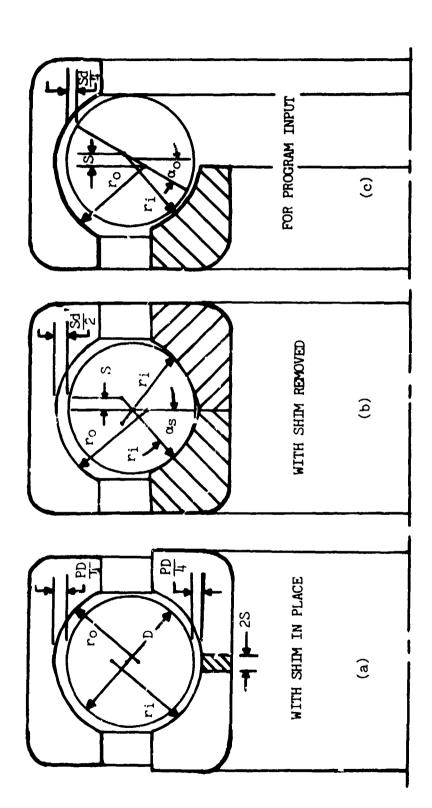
SPLIT INNER RING BALL BEARING GEOMETRY
